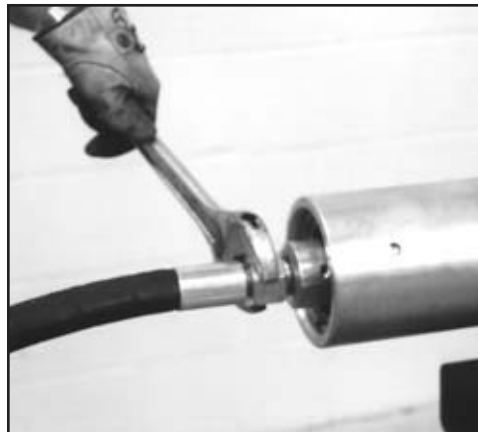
REMOVE OLD AIR HOSE AND REPLACE WITH NEW ONE
